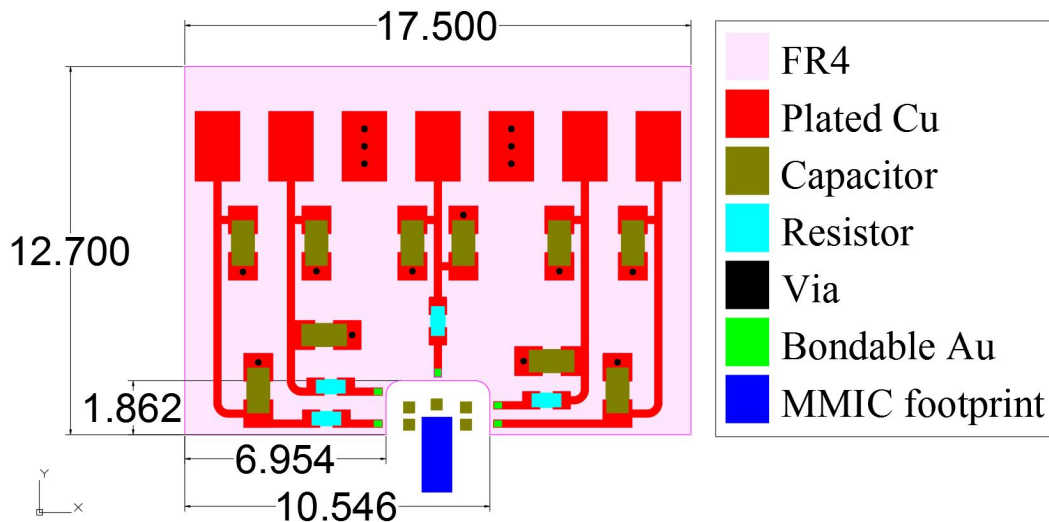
Assembly drawing of the bias and control board. The total size is $17.5 \times 12.5 \text{ mm}^2$. All dimensions are specified in mm.
